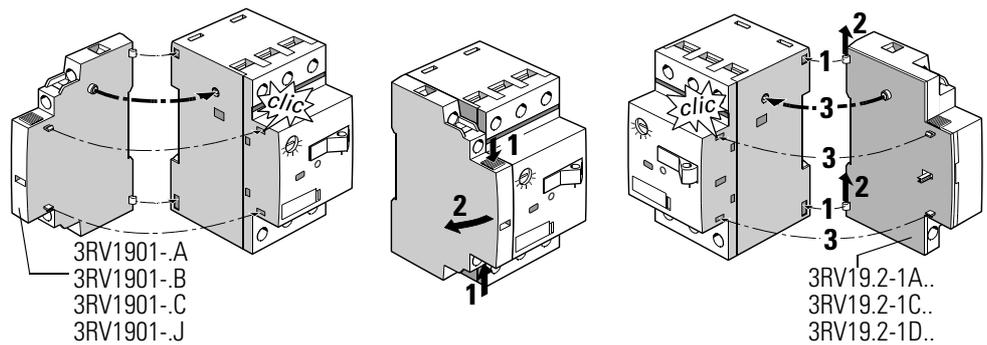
Mounting/removing the side mount auxiliary contacts/undervoltage release (example: frame size S00)
